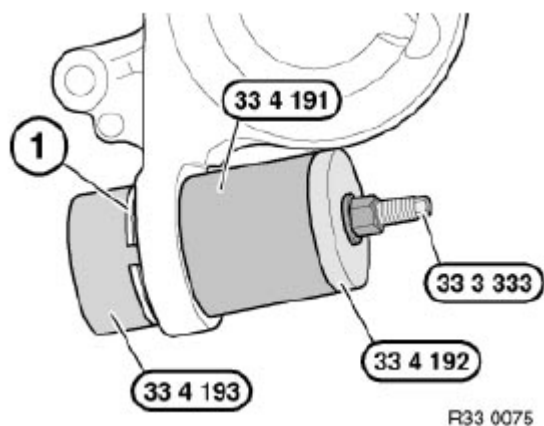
Identifying Special Tools (33 4 193, 33 4 191, 33 4 192 And 33 3 333)
